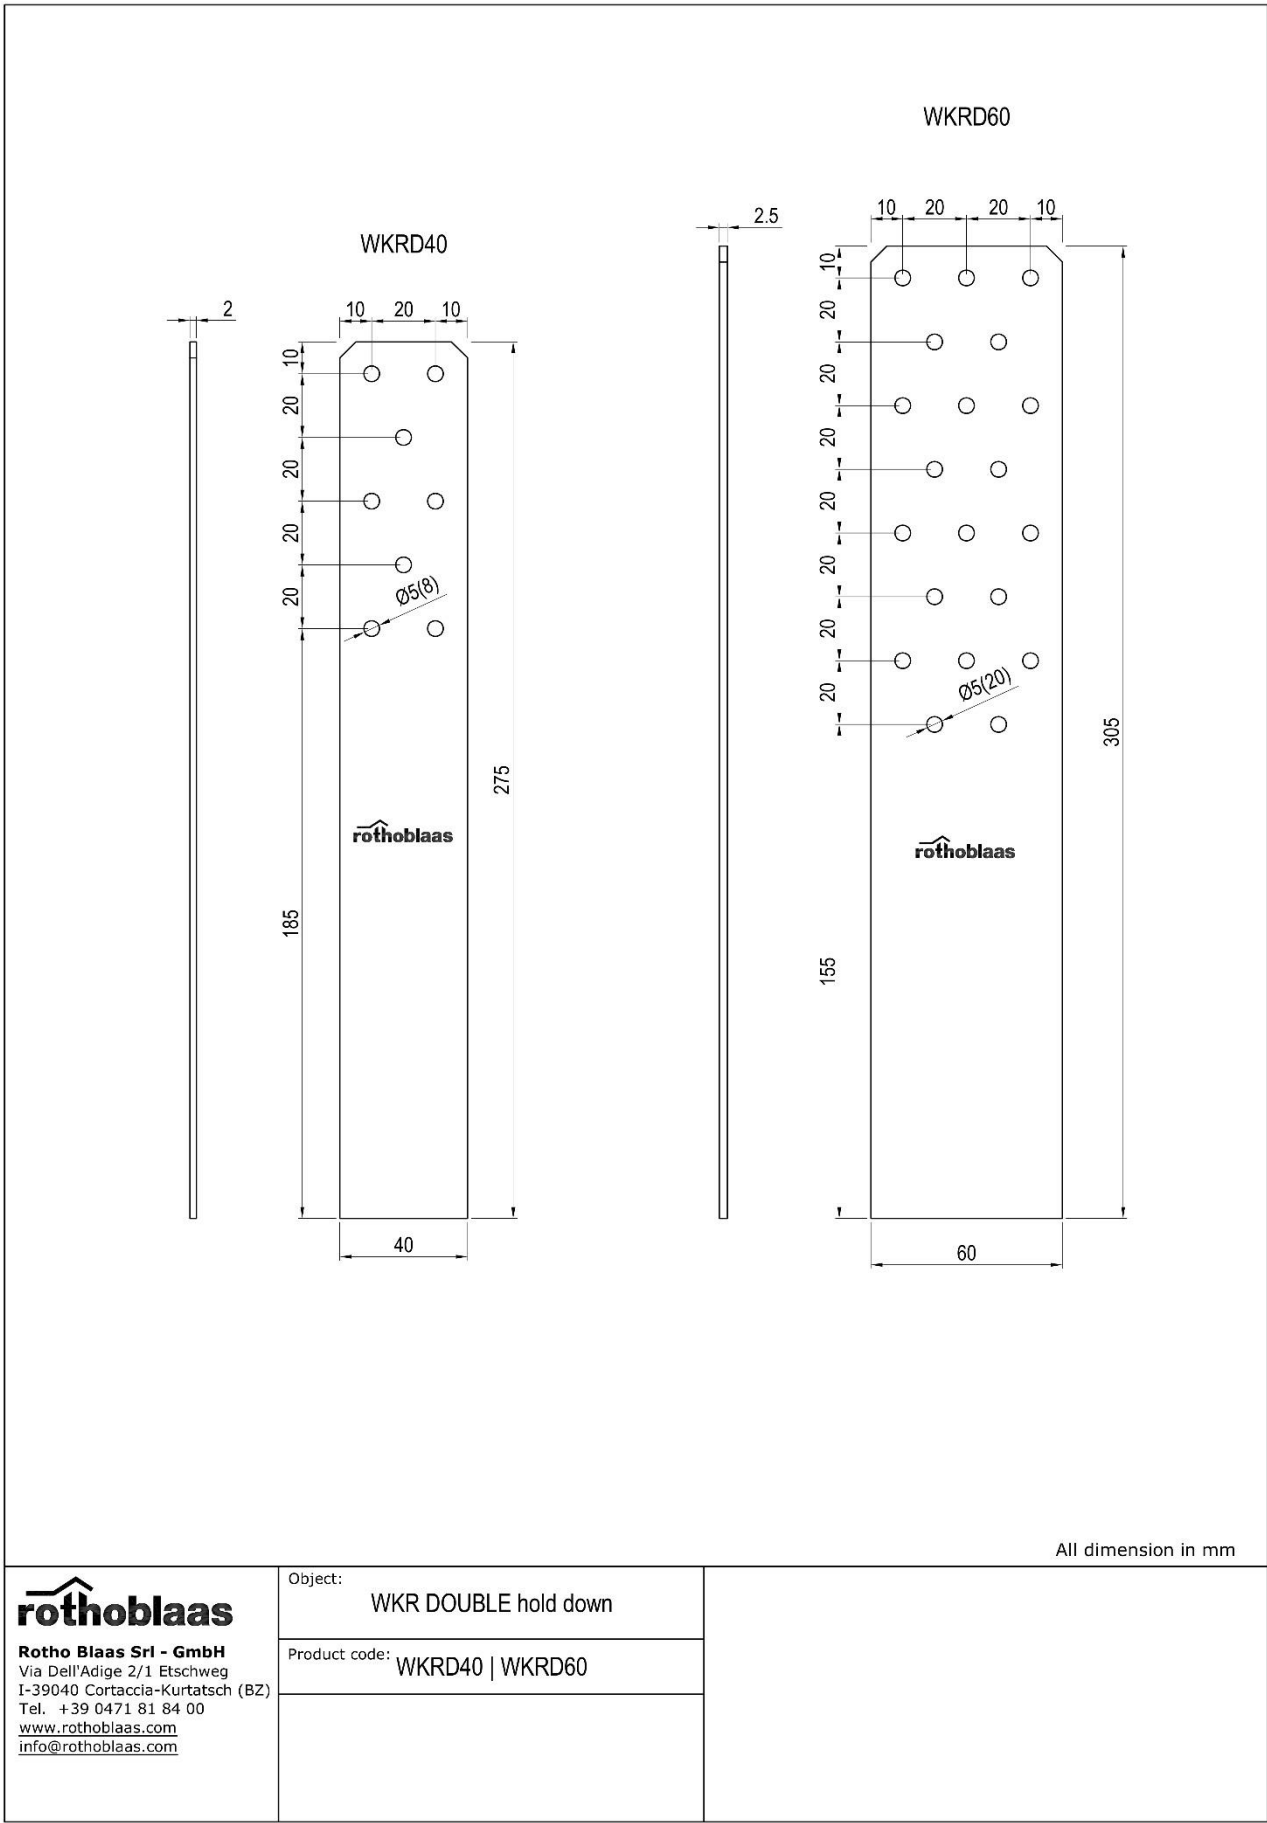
Dimensions of Rotho Blaas WKRD40 and WKRD60
